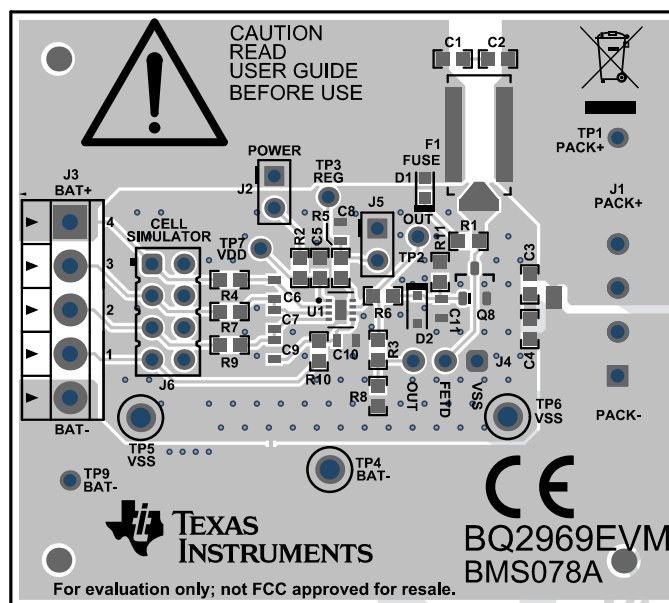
BQ2969 Two-Layer Board Layout - Top Layer
